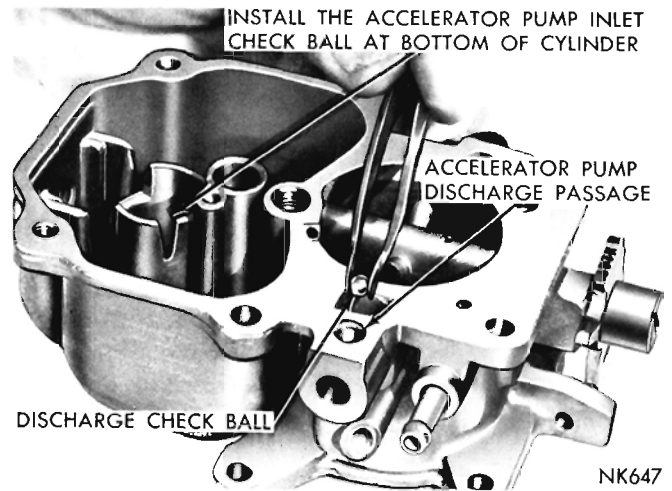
Installing Accelerator Pump Discharge and Intake Check Balls
